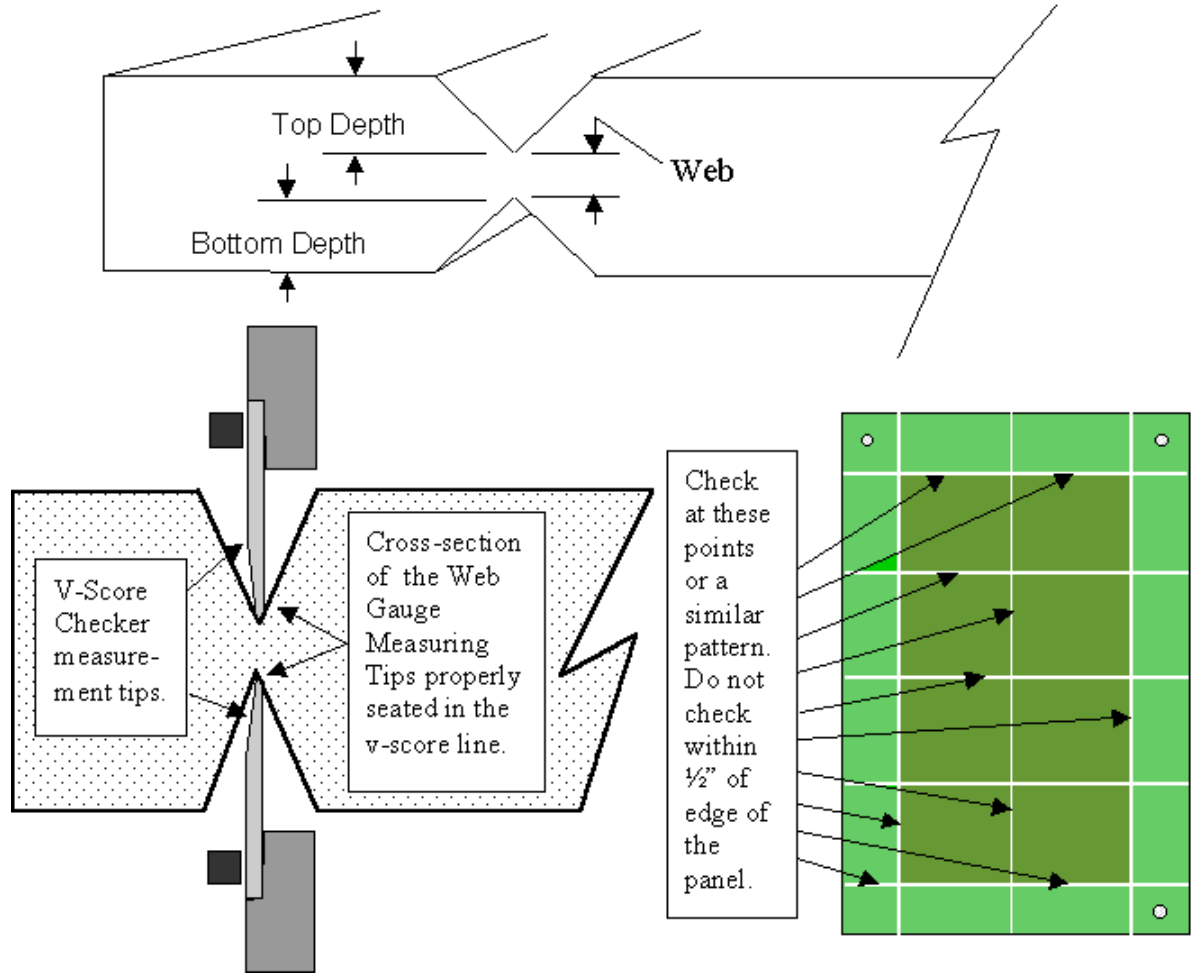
Inspection of the placement accuracy of a V-Score line.
